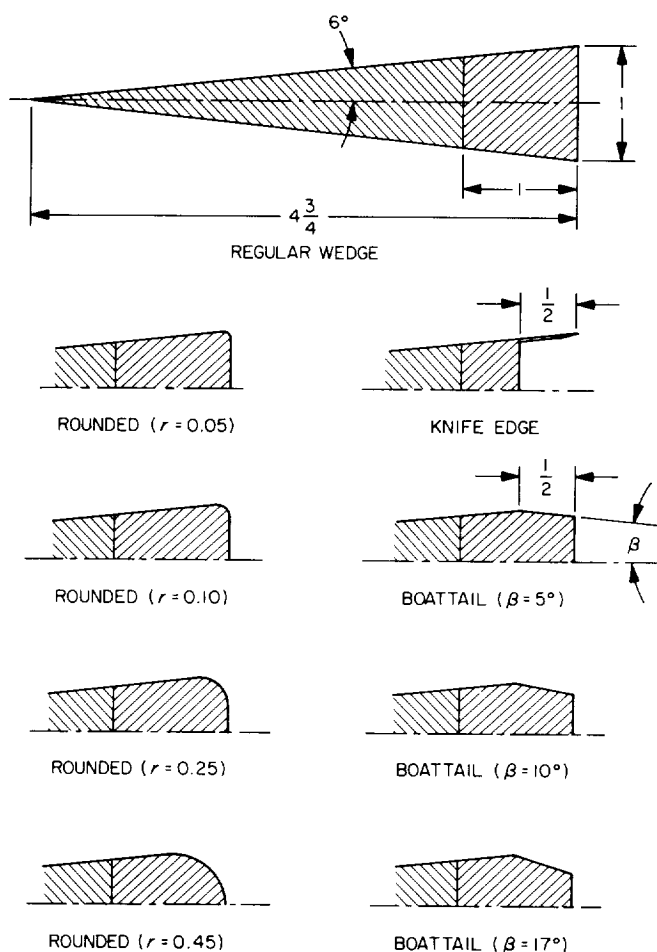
Test models with modified edge shapes (dimensions in inches)
